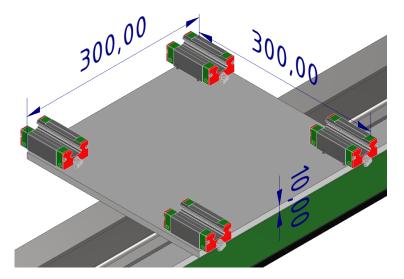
CAD drawing in Autodesk Inventor of the assembly block + rail of a lineal guideway HGH20CA2T1400Z0H+CZS by the company HIWIN.
